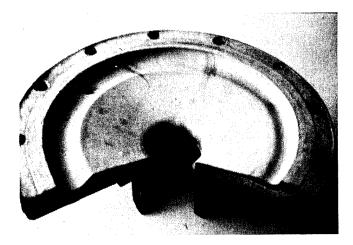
Cut away view of 1-1/2" centrifugal pump housing shows how tenacious bond is affected between metal base and approximately 1/4" thick P.V.F., injection molded lining.
